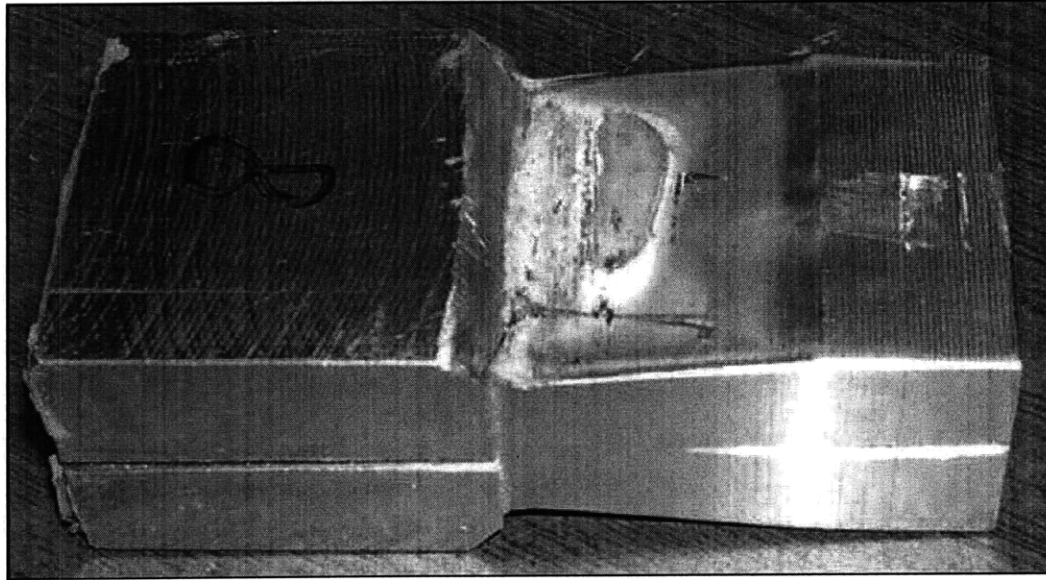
Results of a peel test performed on an electromagnetically welded specimen with rectangular cross-section, showing the base metal failure [60].
